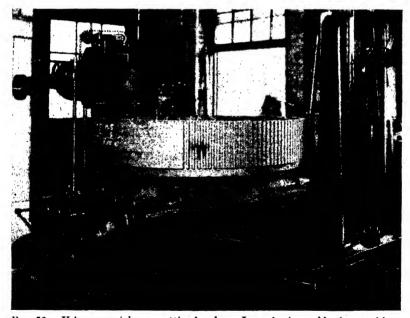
Using a special gear-cutting head on a Lucas horizontal boring machine.
